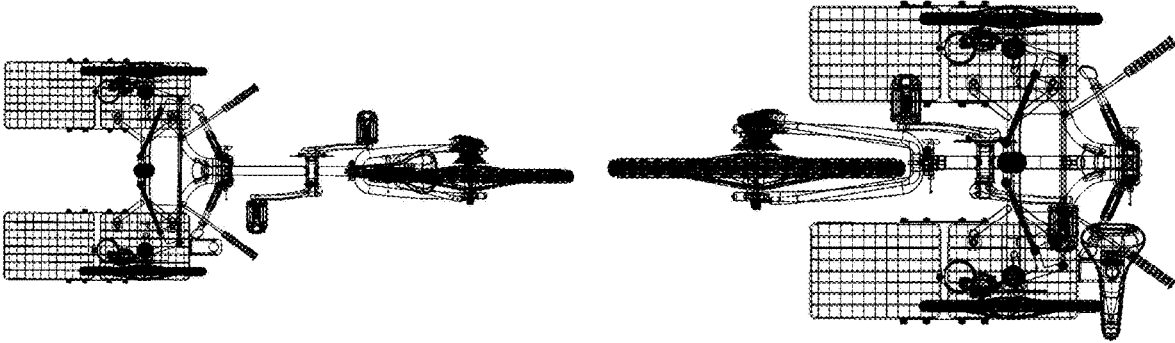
is a top plan view similar to FIG. 11 but showing the basket assembly stowed; FIG. 14 is a top plan view similar to FIG. 12 but showing the basket assembly stowed.
